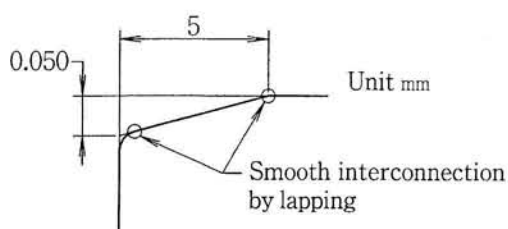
Crowning dimensions for small-diameter BUR bearings
